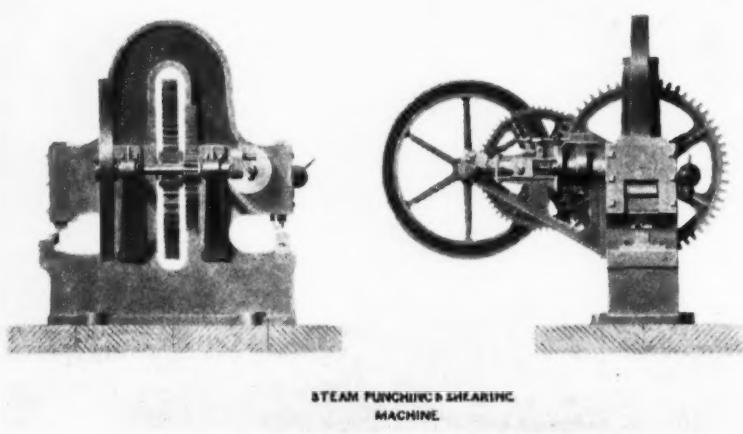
(Left) Nasmyth Steam Punching and Shearing Machine Reproduced from a Colored Drawing, Shaded, and Mounted on Linen, Bearing the Date of June 15, 1853
